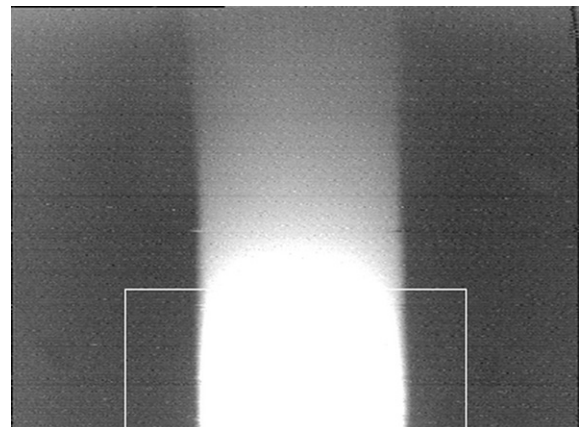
Typical deposited weld bead image during GMAW-based rapid manufacturing.
